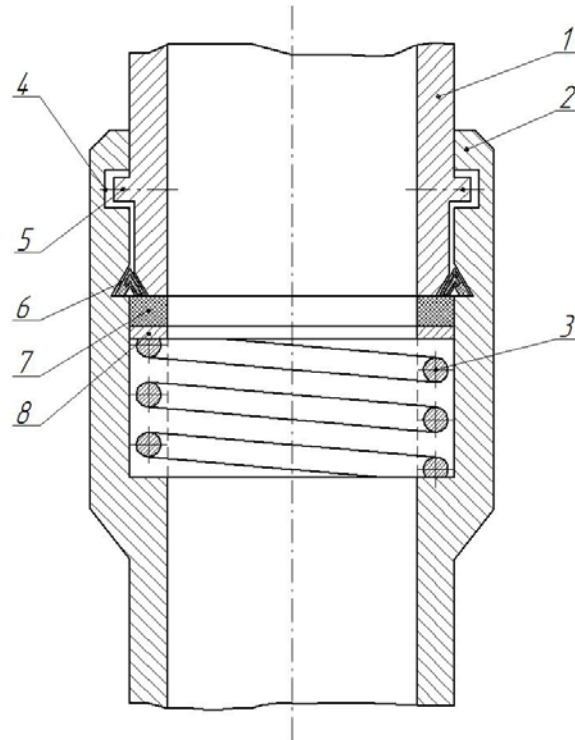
1 – Bow part; 2 – Engagement part; 3 – Spring; 4 – Slot; 5 – Arm; 6 – Ring elastic; 7 – Bearing; 8 – Ring metal
